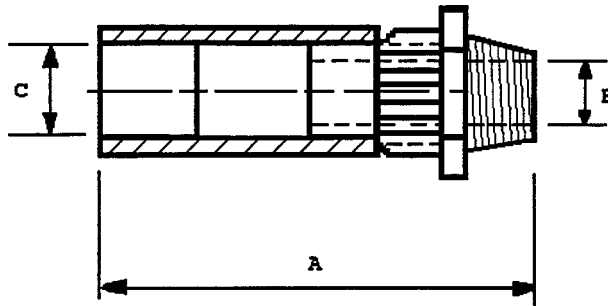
Type II-Single-Legged Threaded Cable Entry Seals
